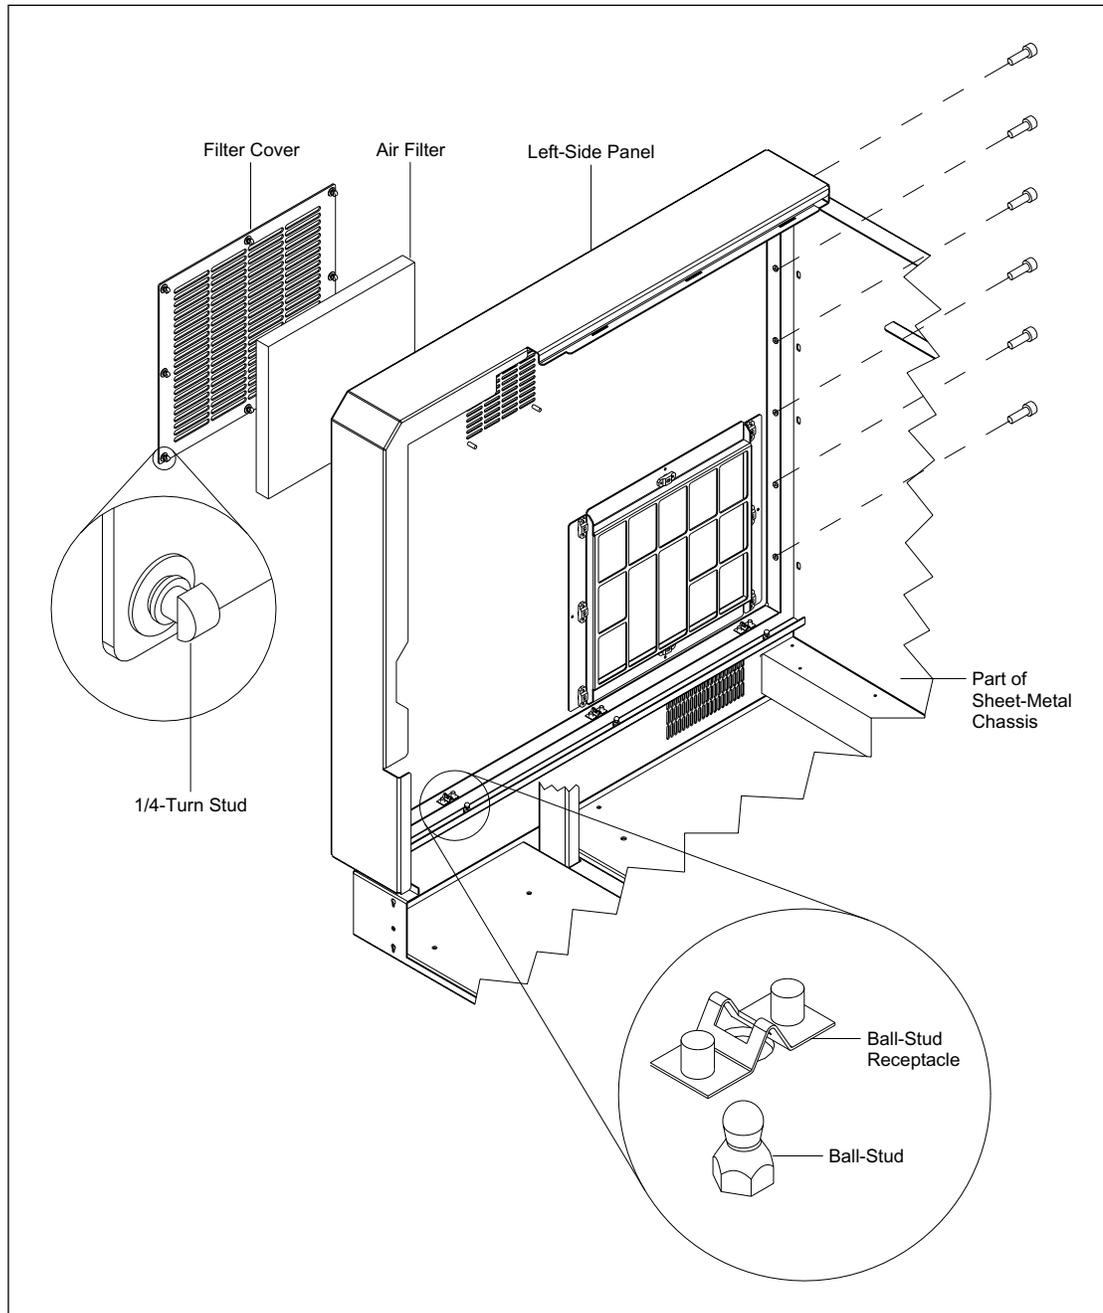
Left Panel and Air Filter Assembly Mounting.
